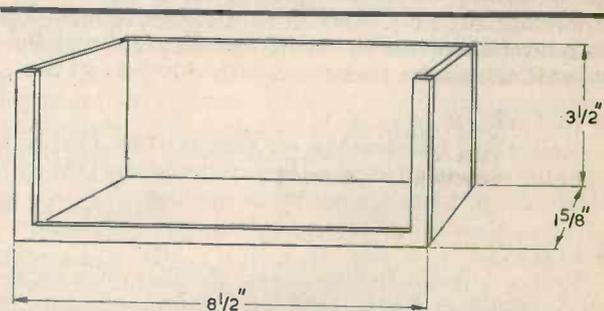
The pieces of Fig.7 made up to form the case, into which the receiver assembly slides. The dimensions shown here and in Fig.7 are for guidance only, and the case should be made, in practice, to take the receiver assembly as constructed.
